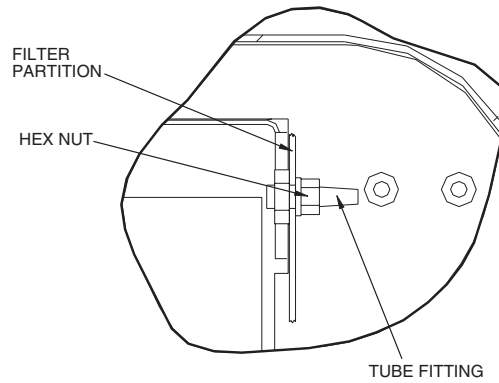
Indicator Location and Tube Routing (48/50PG03-16 Units)
